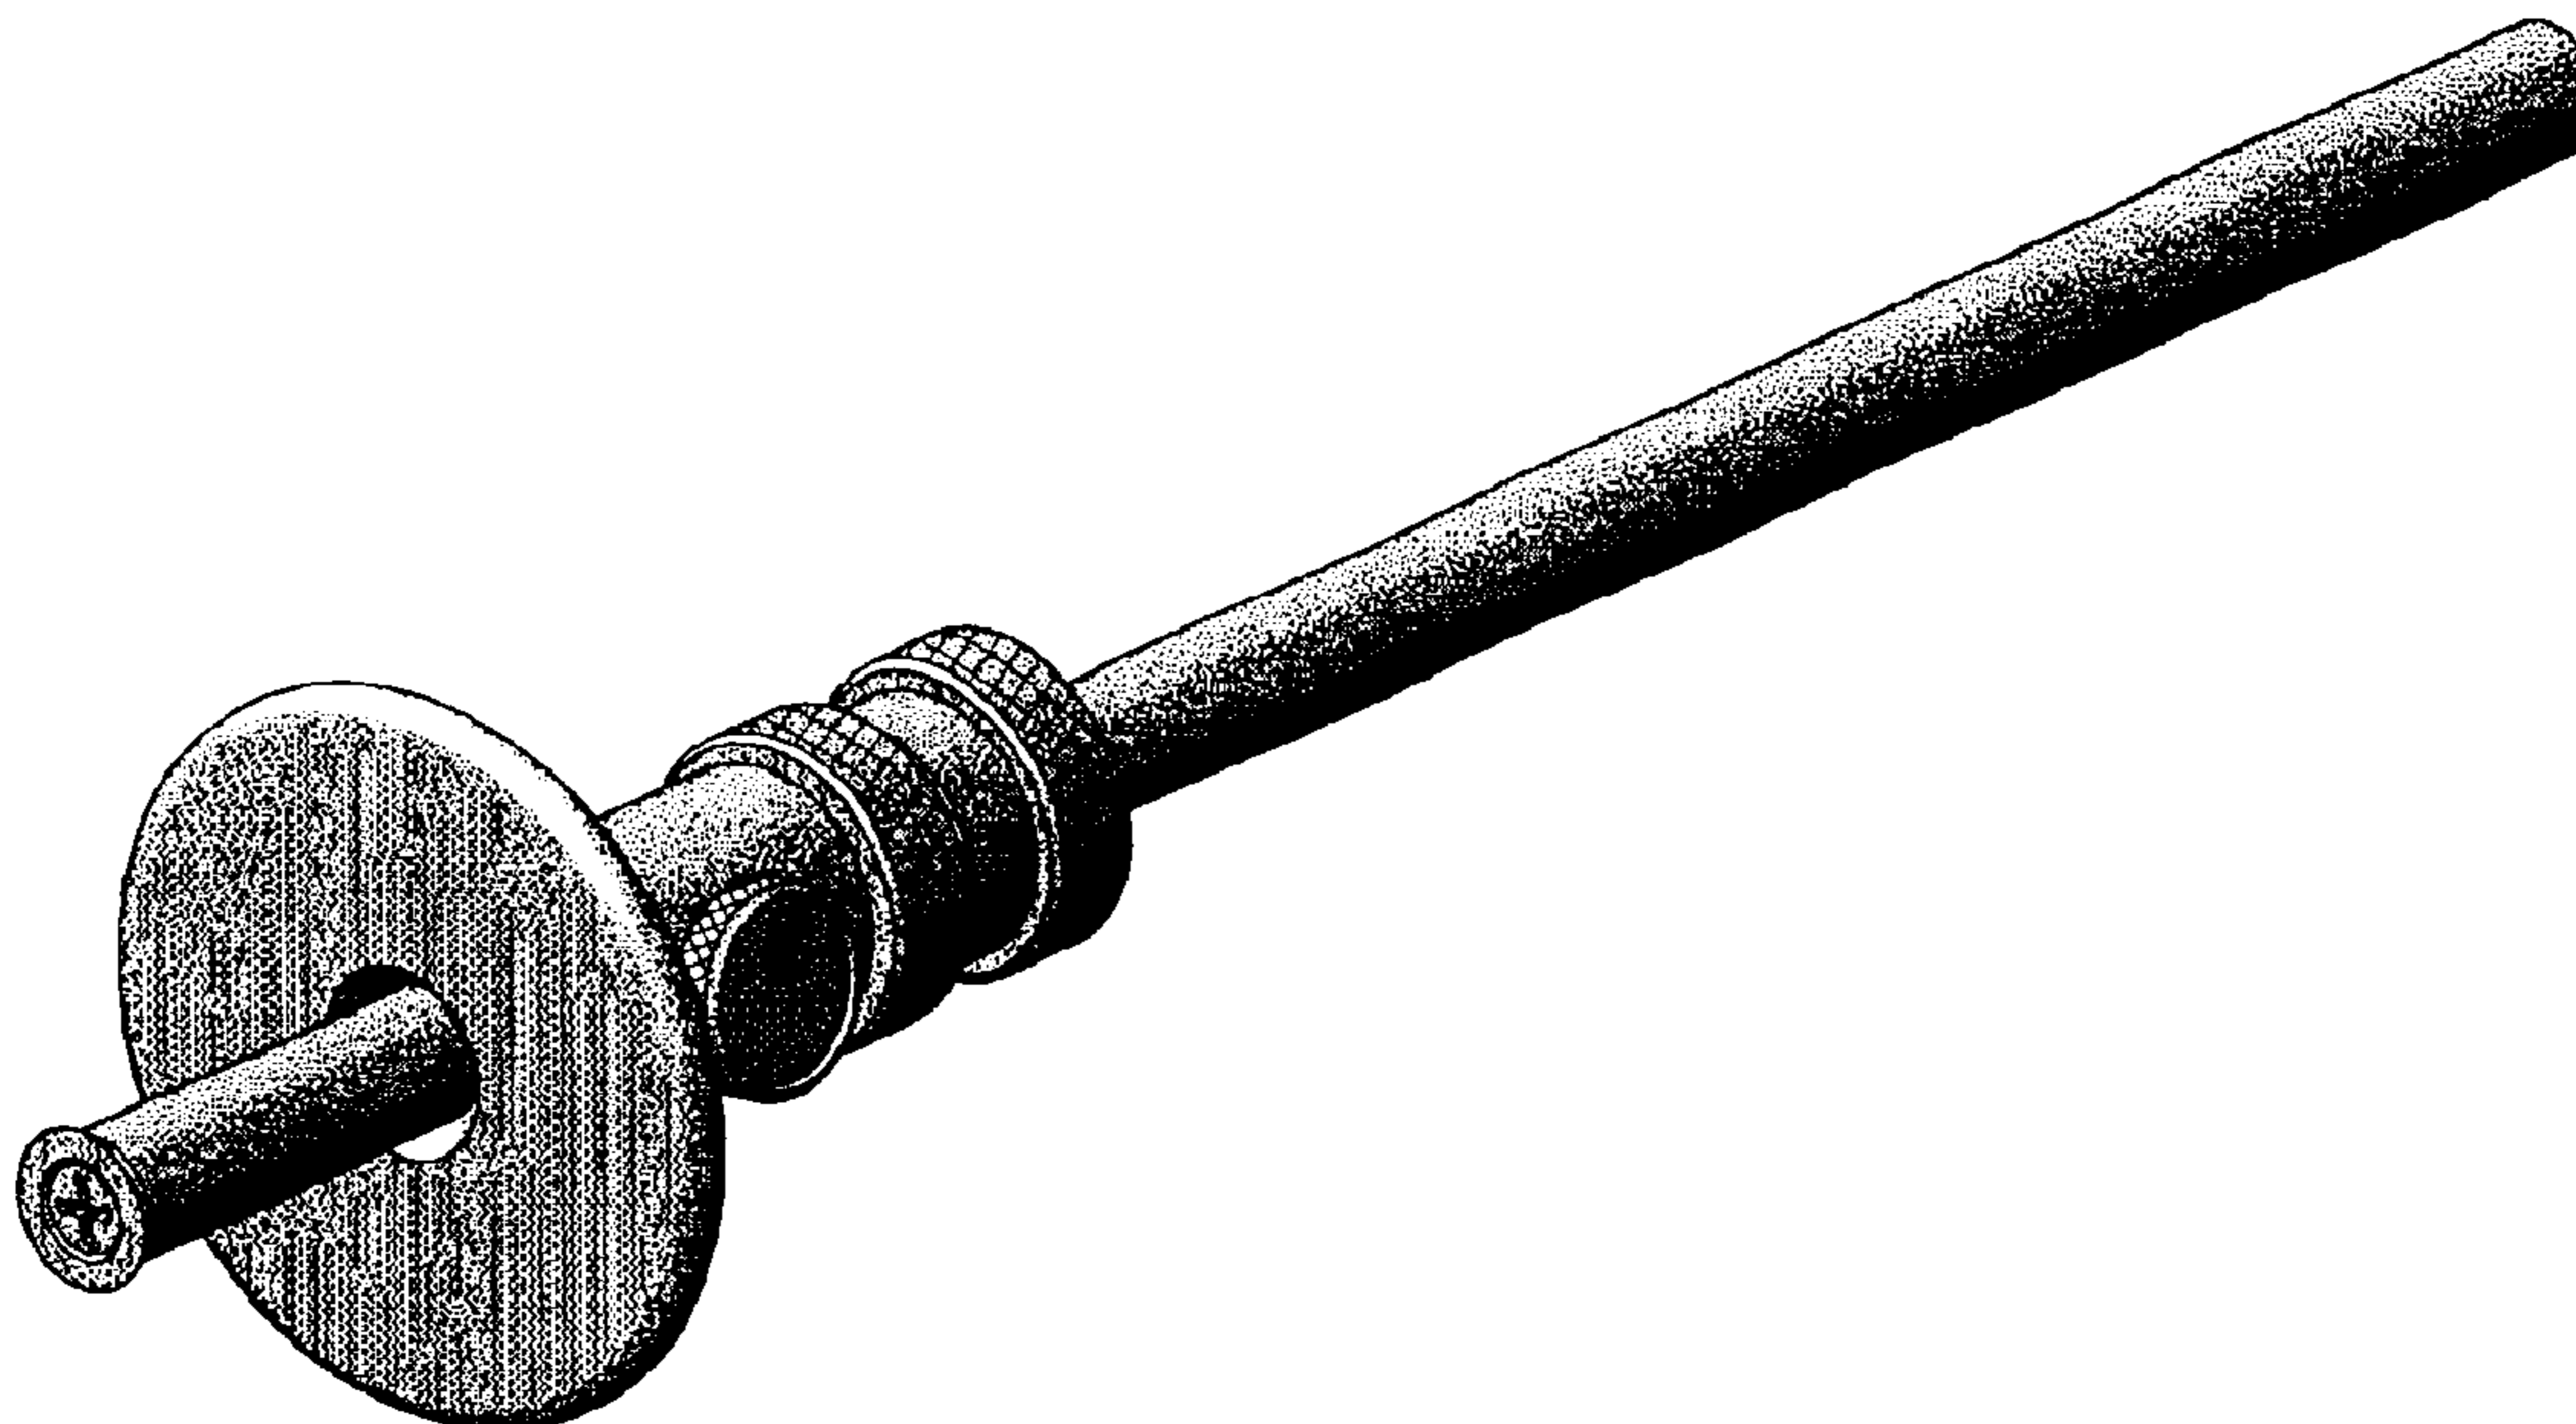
is another side view of micro-adjust wheel marking gauge shown in FIG. 1.
